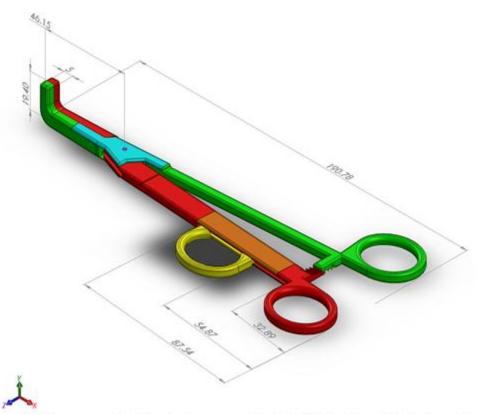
The seven parts of the device as assembled with the tips closed. Note: the spring and the wire are hidden. All dimensions are in mm.
